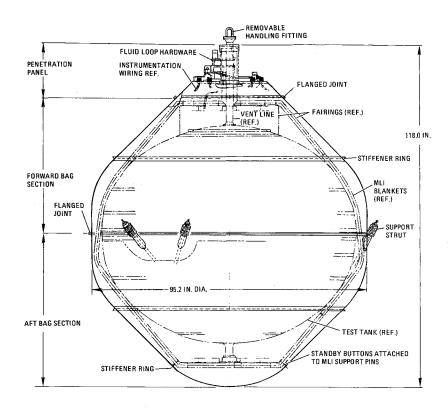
Purge bag, multilayer insulation, and test tank assembly test configuration.
